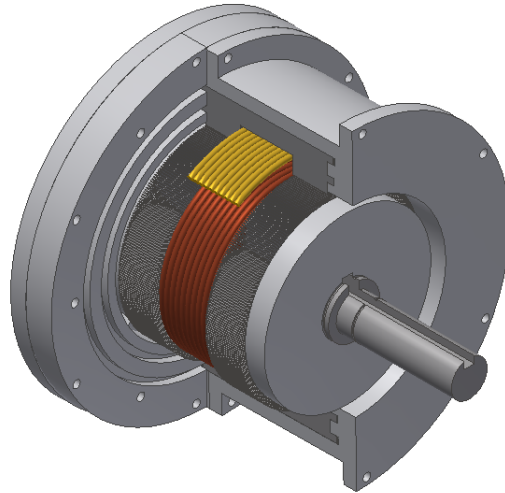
Cross sectional view of the complete RT assembly. The secondary side of the RT from Figure 6.1(b) is mounted inside the primary side shown in Figure 6.1(a).
